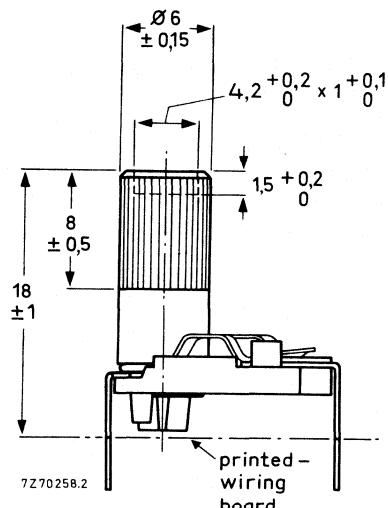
Test switch for horizontal mounting with adjustment knob at the side of the selector contact.
